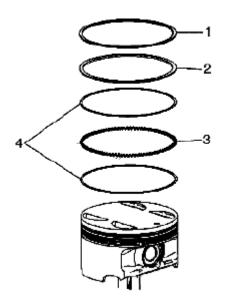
Identifying Oil Control Ring Expander Courtesy of SUZUKI OF AMERICA CORP.
